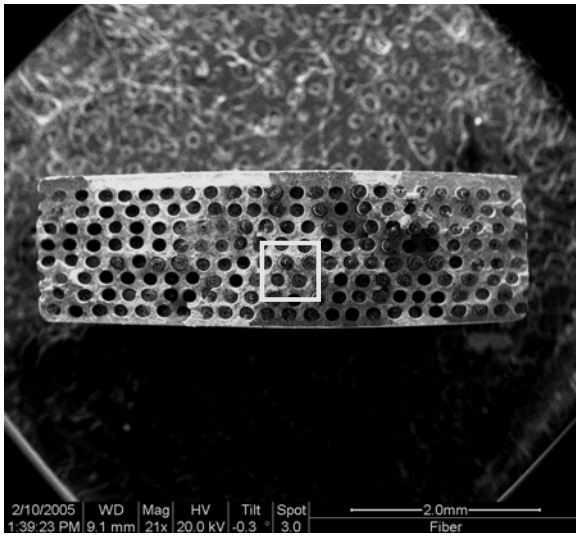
Specimen TMC-10, overall view of fracture surface
